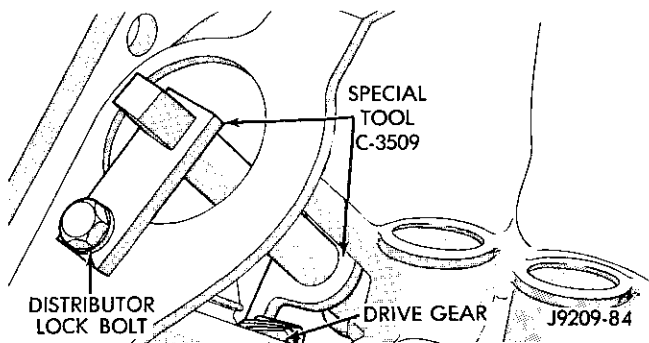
Camshaft Holding Tool C-3509 (Installed Position)
